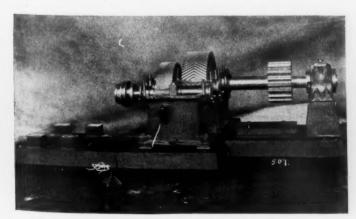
Herringbone geared speed reducers with roller bearings—double reduction 10:1 and 60:1 for between 5 and 200 hp.
